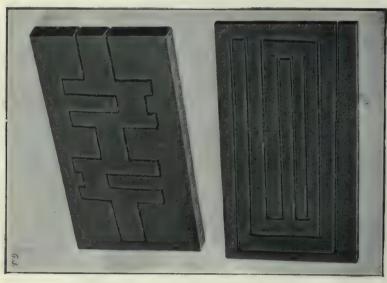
Steel plates cut by the Oxy-aceyline Blowpipe.
